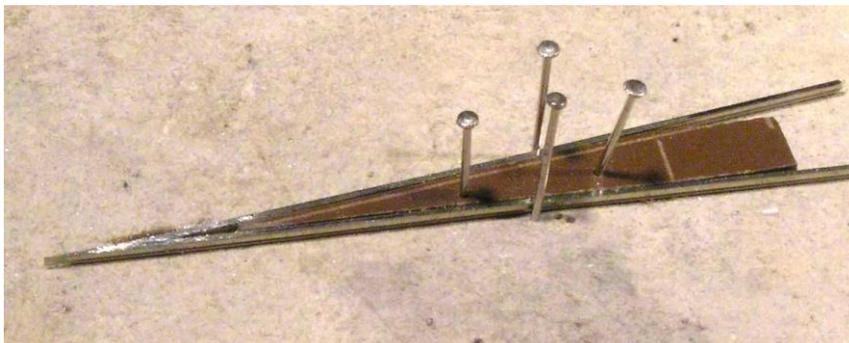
Soldering a vee with a simple former. Two holes in the former pin it to the base making it easier to align the rails. This example will need a little cleaning up to remove the excess solder.
